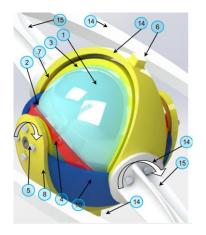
Joint element. Section detail. 1-15 see fig 7 and 9
